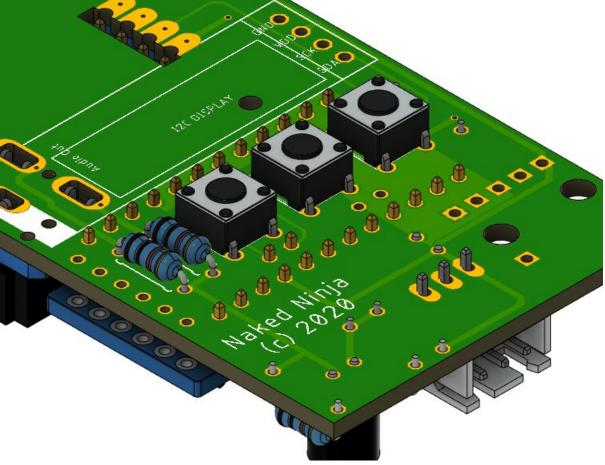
Angle top view of VU Stick V1.2 PCB with soldered male headers.
